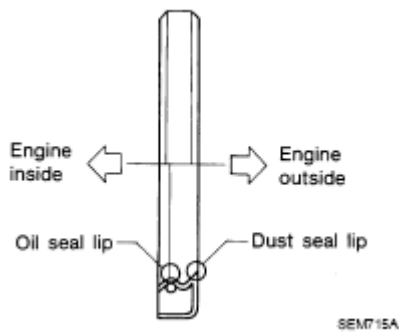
Identifying Engine Oil To Both Oil Seal Lip And Dust Seal Lip
